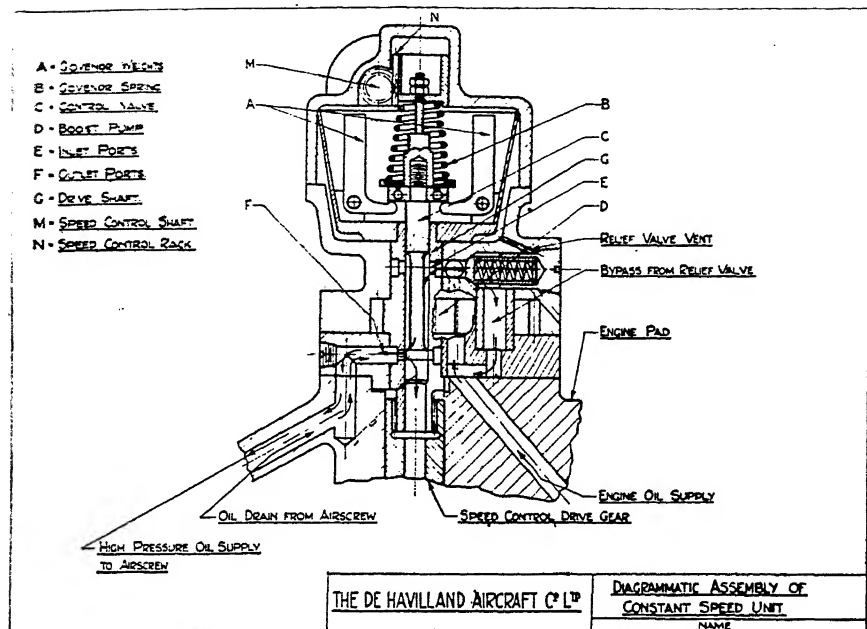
DIAGRAMMATIC ASSEMBLY OF CONSTANT SPEED UNIT.
